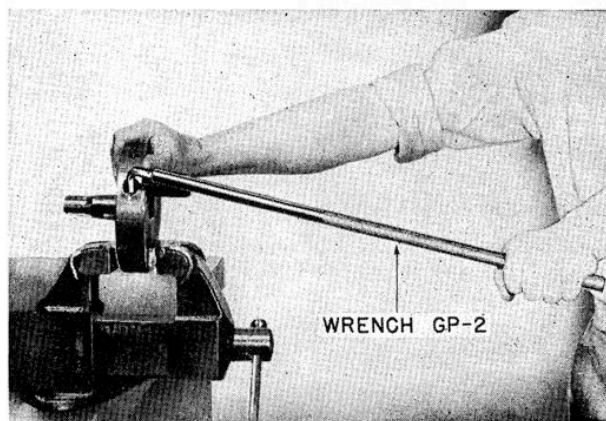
REPLACING CRANKSHAFT CRANK PIN
